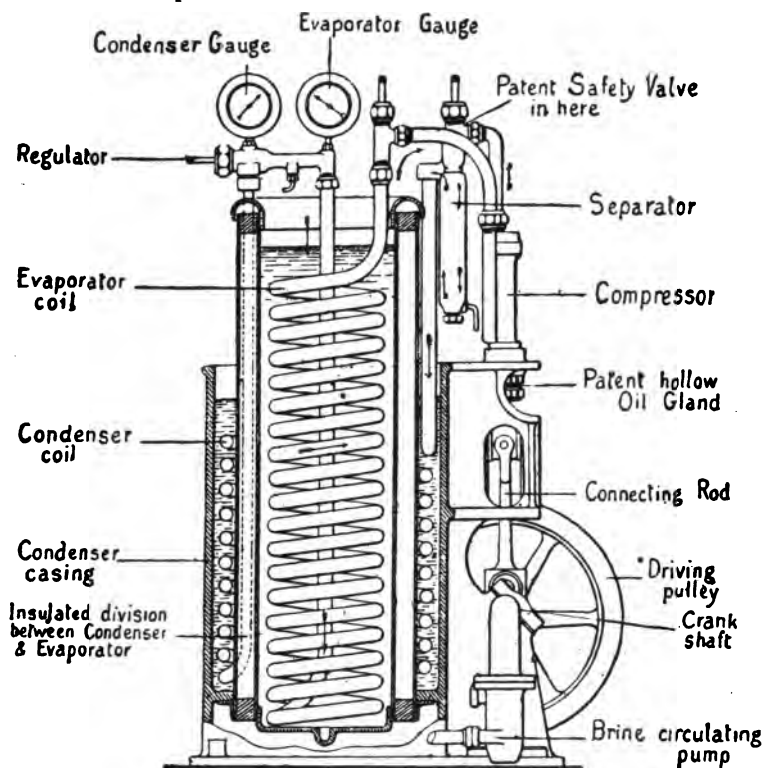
ARRANGEMENT OF PARTS IN COMPRESSION MACHINE.
